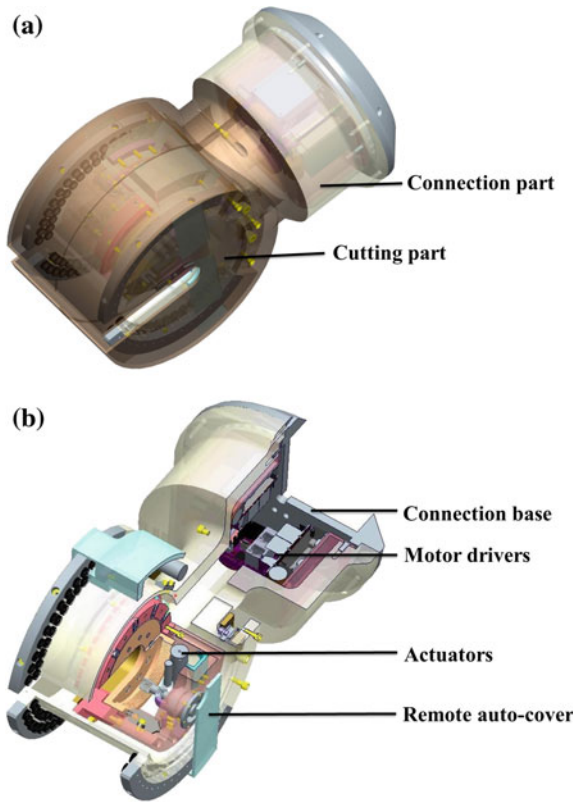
a Remote cutting tool—assembly drawing and b remote cutting tool—sectional drawing
